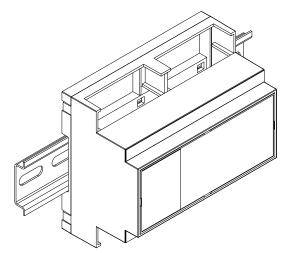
Enclosure mounted on DIN rail (circuit board not shown)
